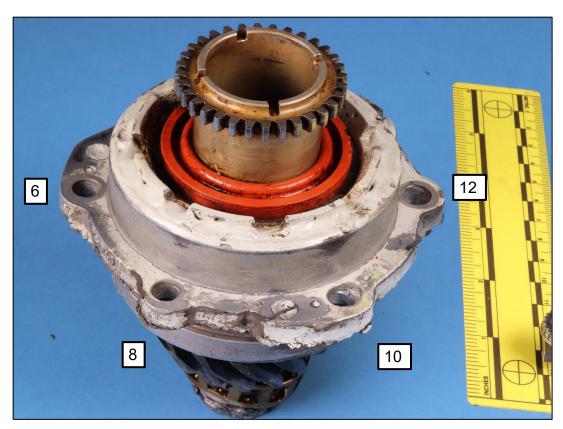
Lower forward side of the input quill assembly showing painted sleeve surfaces.
